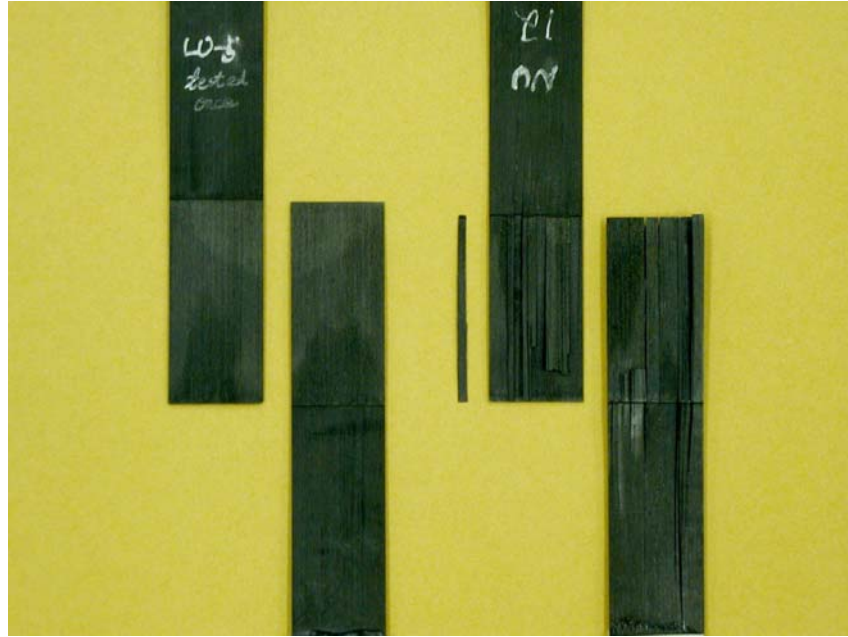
Typical fracture surfaces of LU (left) and NU (right) joints.
